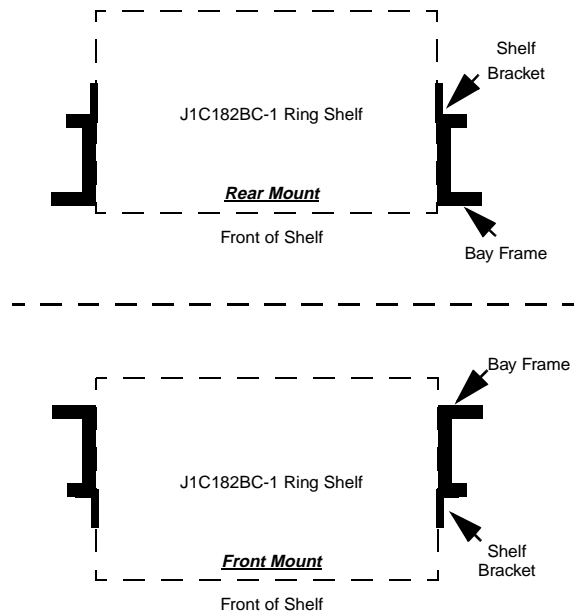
J1C182BC-1, List 3 Remote Terminal Ring Shelf Bracket Mounting Positions (Top View)
